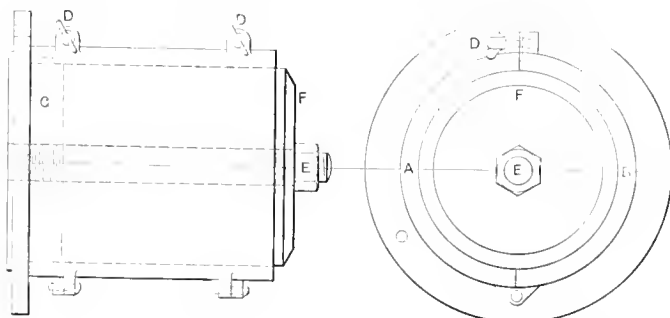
Fixture for Holding the Rings when Finishing the Outside.
